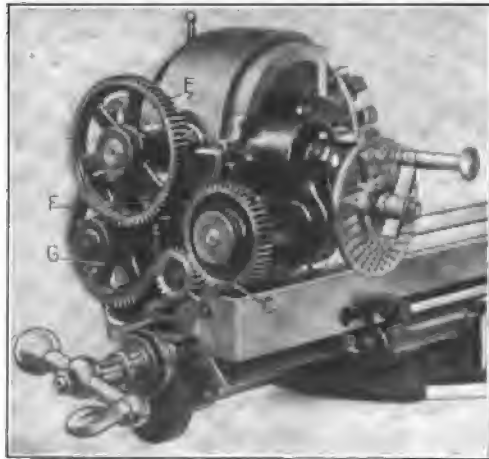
Index Head equipped with Compound Gearing for Differential Indexing
